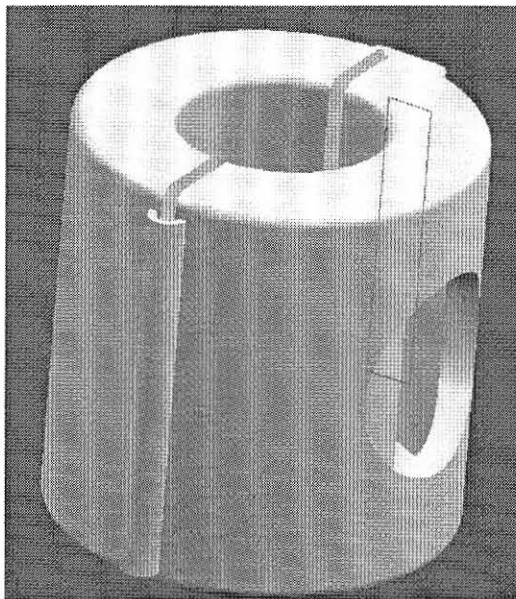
The hole in the side of the housing was to accommodate room for a foil strain gage to be applied to the inner surface.
